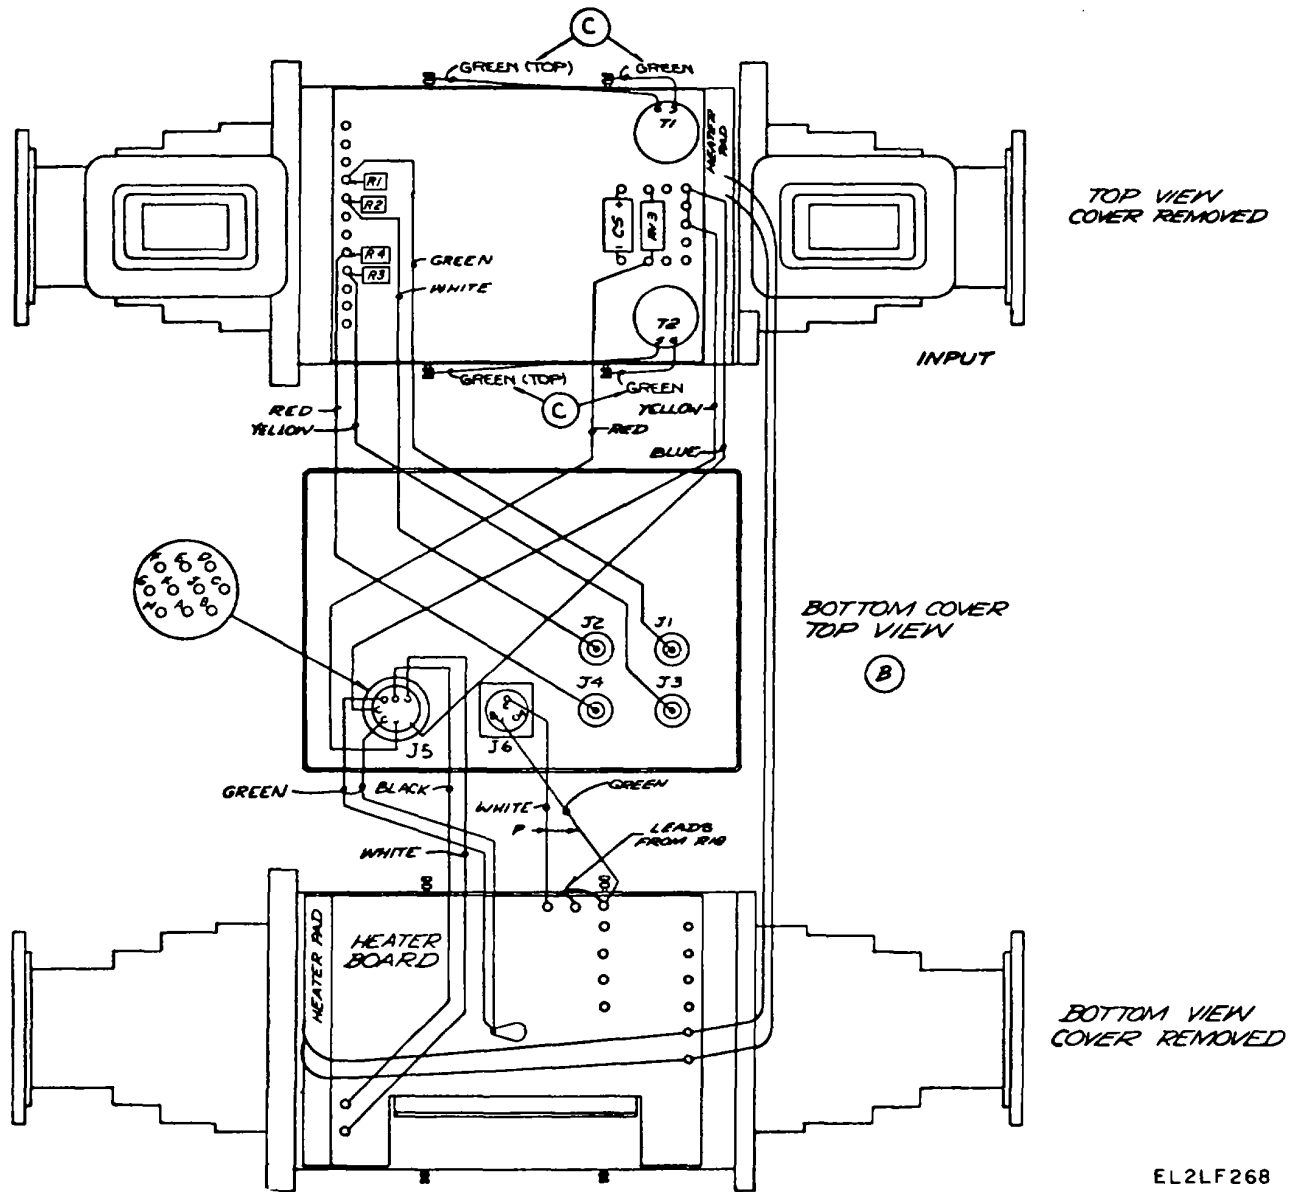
© Azimuth/elevation scanner assembly, wiring diagram (sheet 2 of 2).
